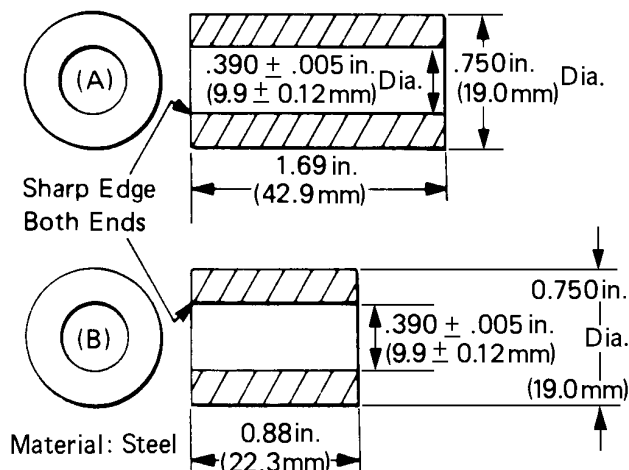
GRIP SPACE AND INSTALLATION SLEEVES
